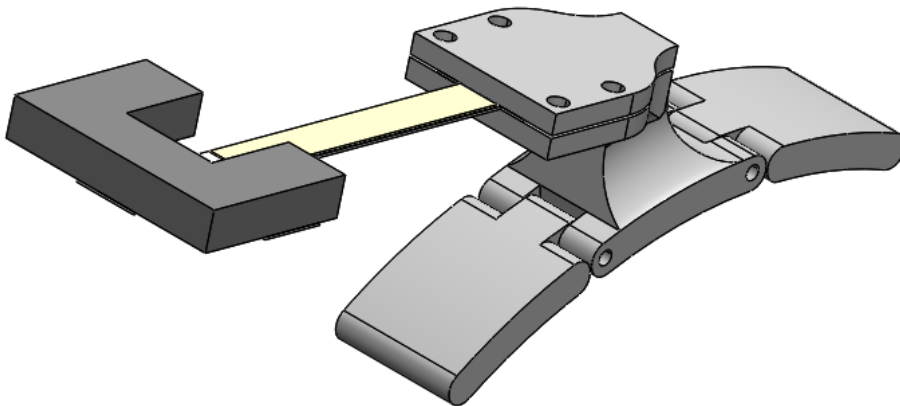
Energy Harvester assembled on the holding assembly
